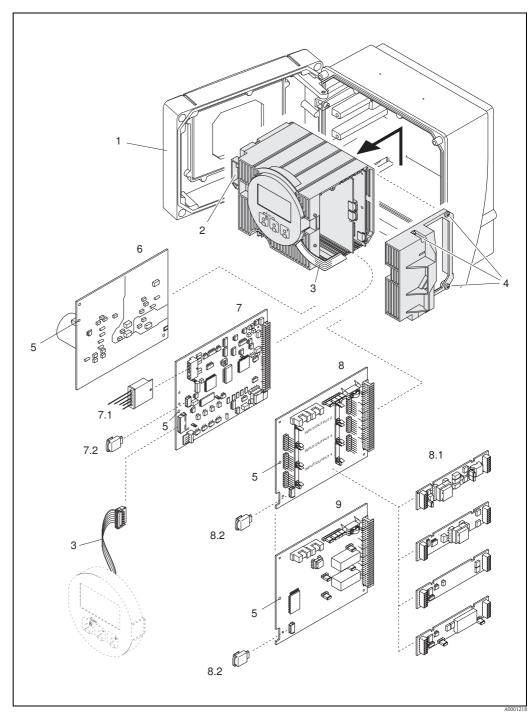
Wall-mount housing: removing and installing printed circuit boards
